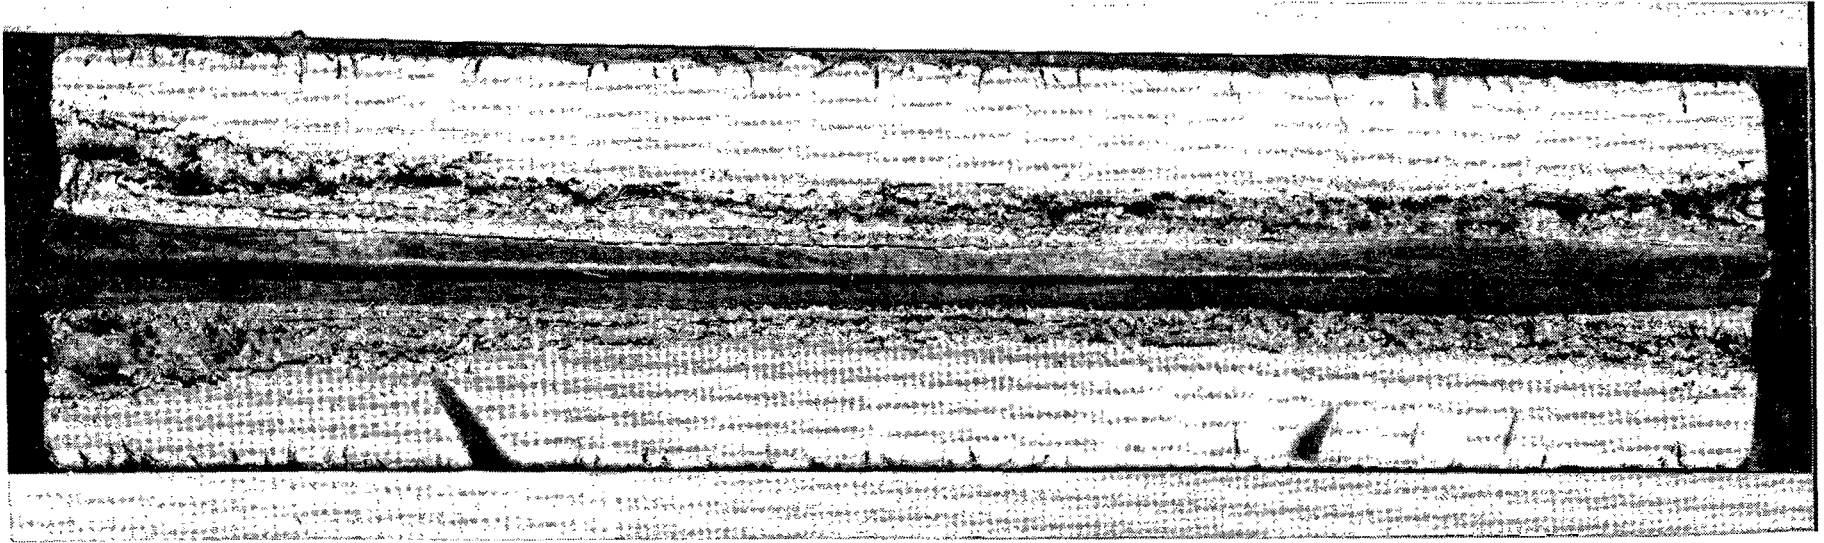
Fracture surface 25 mm specimen (scale 1:1).
